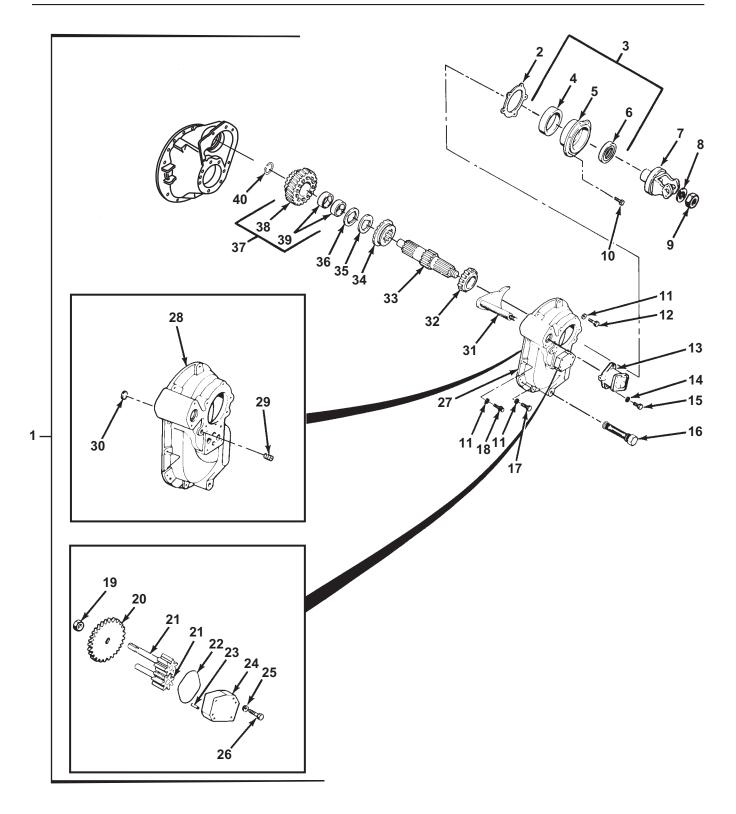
NO. 3 AXLE CARRIER (Sheet 1 of 3)
